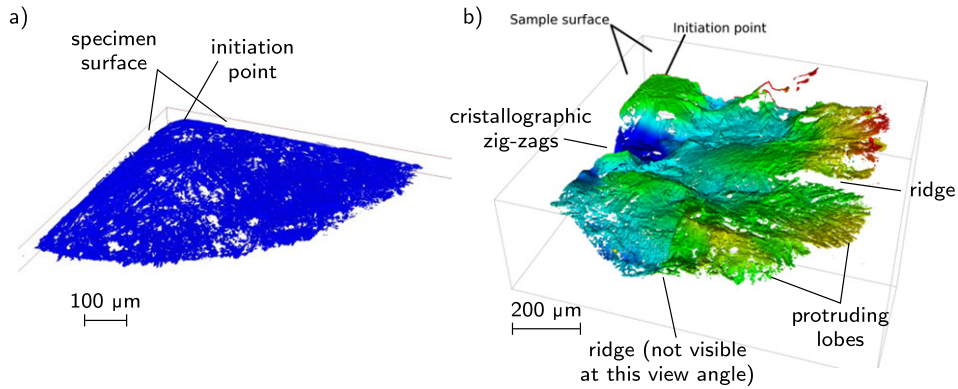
Three-dimensional rendering of fatigue cracks imaged by SRCT in both alloys (the colour indicates the height of the crack in the sample): a) crack in the 5091 alloy, the crack length is 500 μm , the crack surface is highly planar; b) crack in the 2027 alloy, the crack length is 700 μm , a more irregular crack surface is observed.
